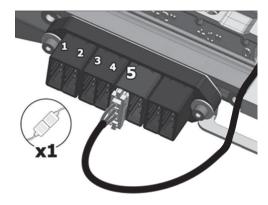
Tilt motor cabling is attached to the contact block on the seat frame.
